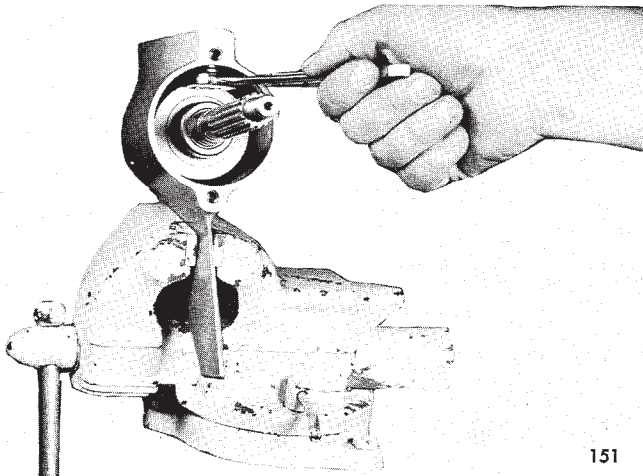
REMOVING PROPELLER SHAFT BEARING CAGE
